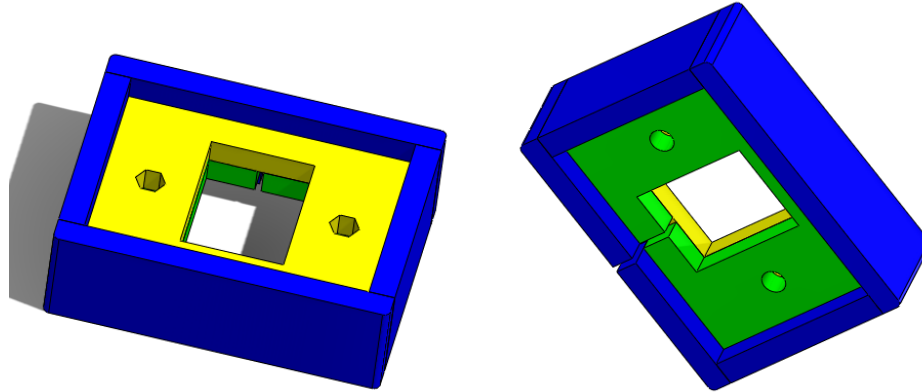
Outer Walls and Sensor Holder Assembly of Pinching Device
